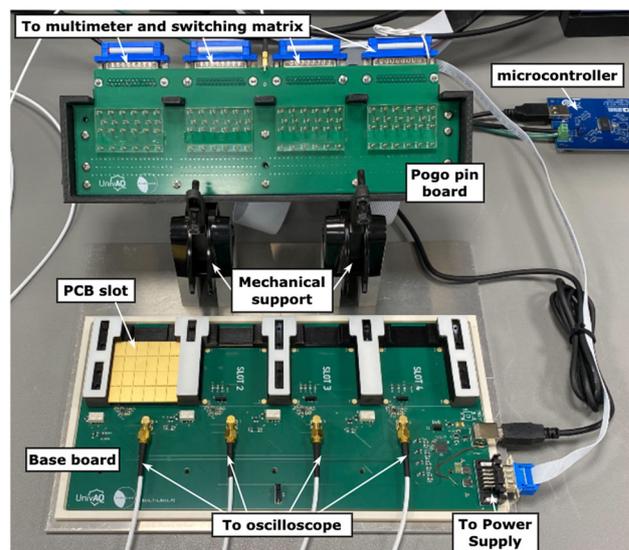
Tile PCB electrical assessment setup. The testing setup is composed of a base with 4 connectors hosting 4 PCBs. A lid with a pogo pin board is placed on the PCBs to measure the passive components of the voltage divider
